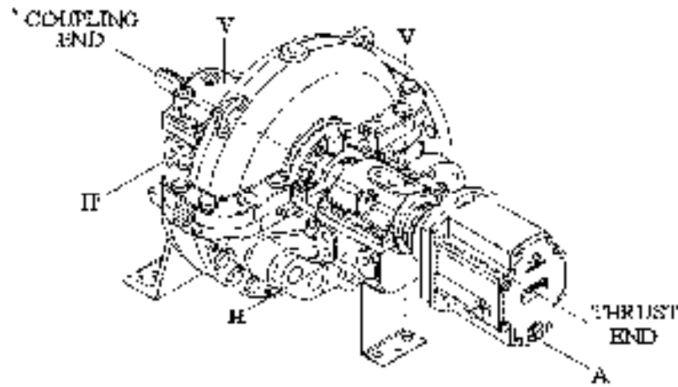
Bearing Housing Dimple Locations for Vibration Measurements
